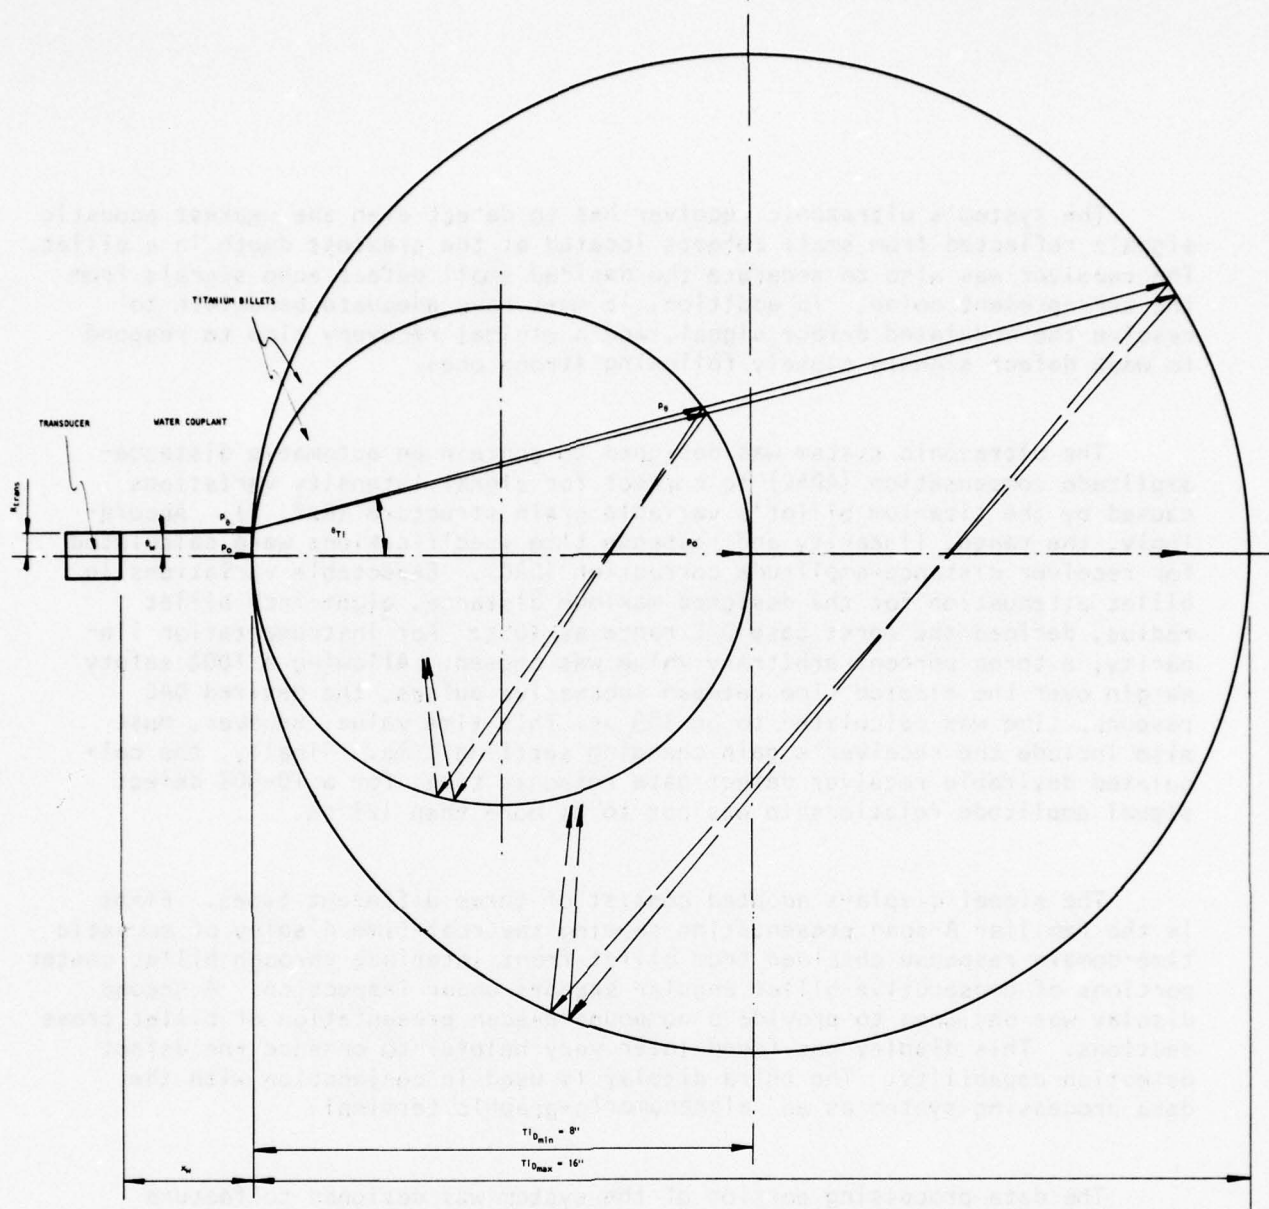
Acoustic Illumination of Titanium Billets by Conventional Inspection Technique
